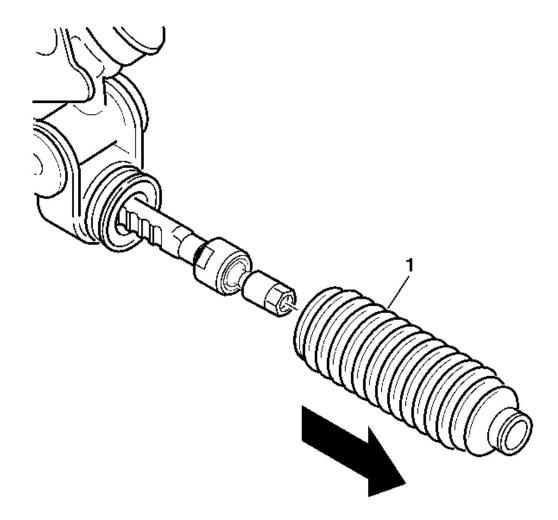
View Of Rack & Pinion Boot & Tie Rod Courtesy of GENERAL MOTORS CORP.
